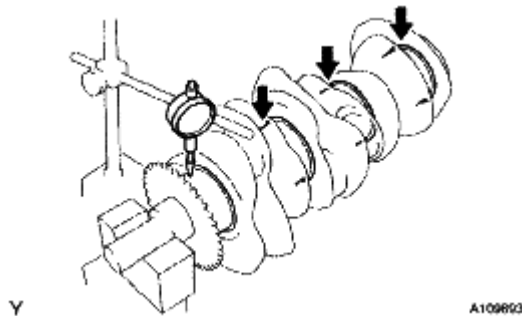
Measuring Circle Runout At Center Journal Using Dial Indicator
